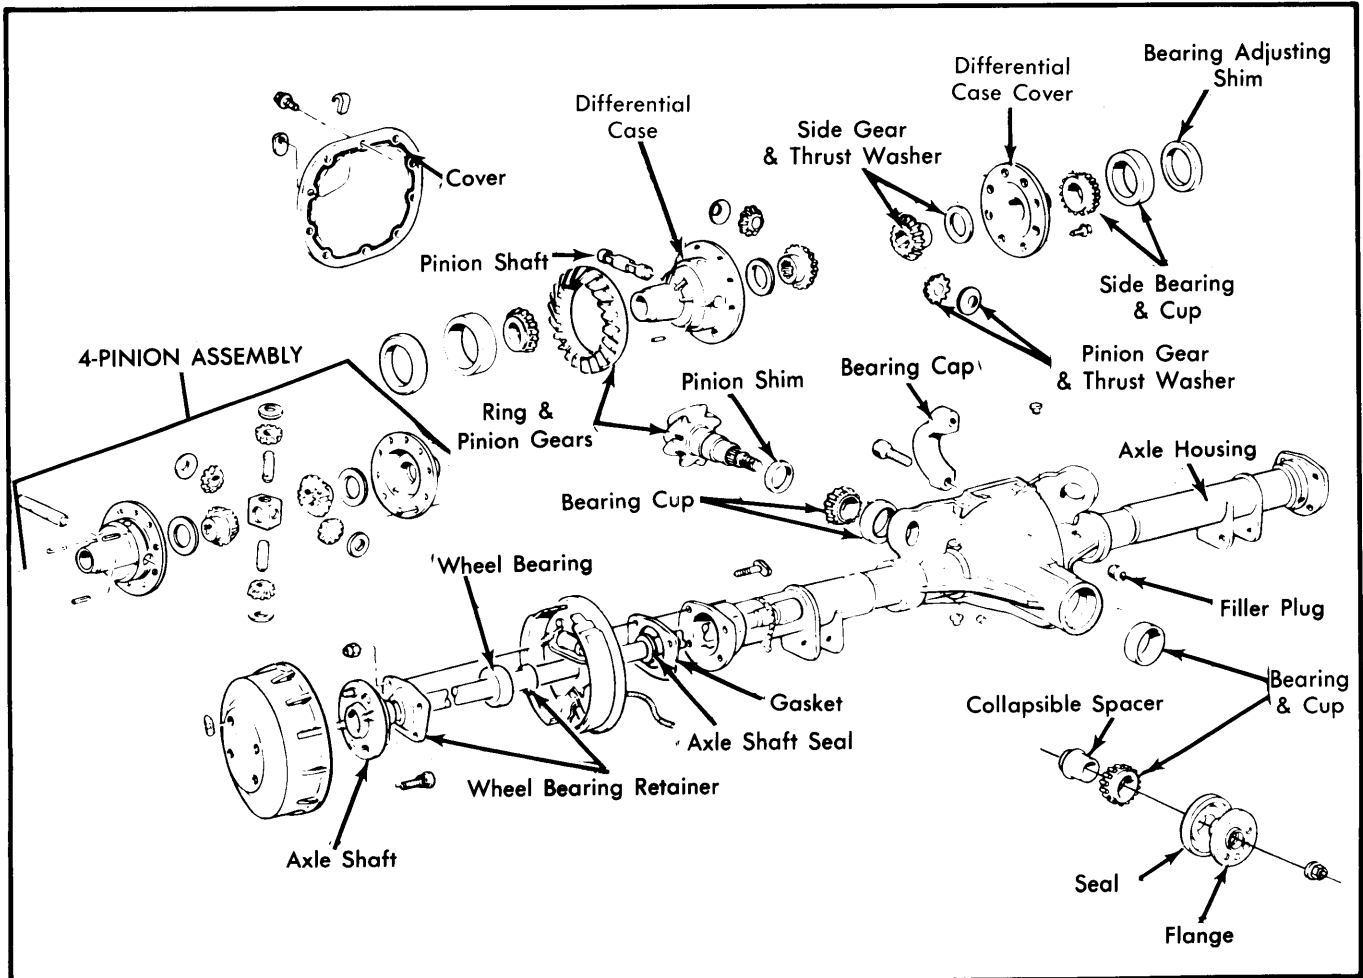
Exploded View of Ford Motor Co. 6 3/4" Integral Housing Axle Assembly
